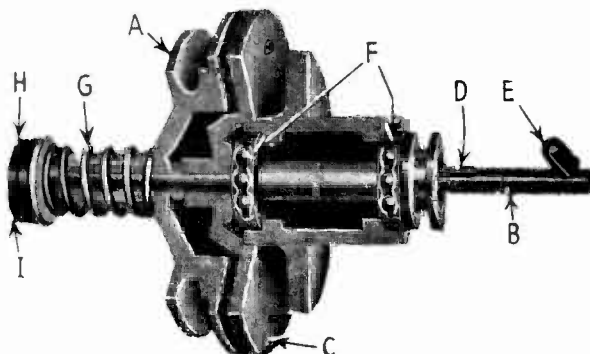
CUT-AWAY VIEW OF TAKE-UP MECHANISM.
